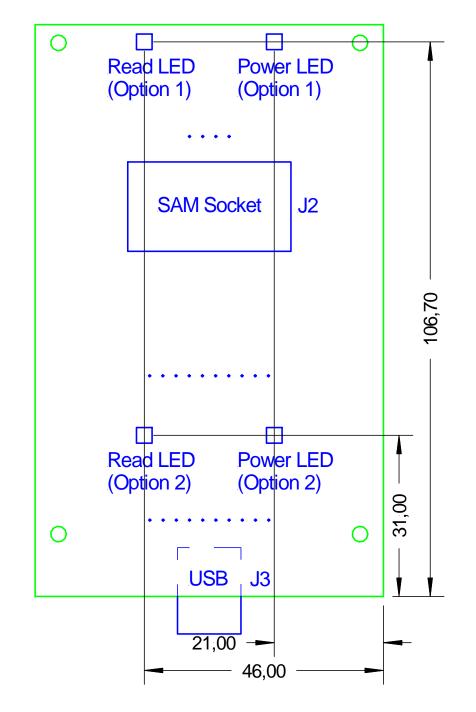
5553 Reader USB Comfort Multi ISO - Bottom View
